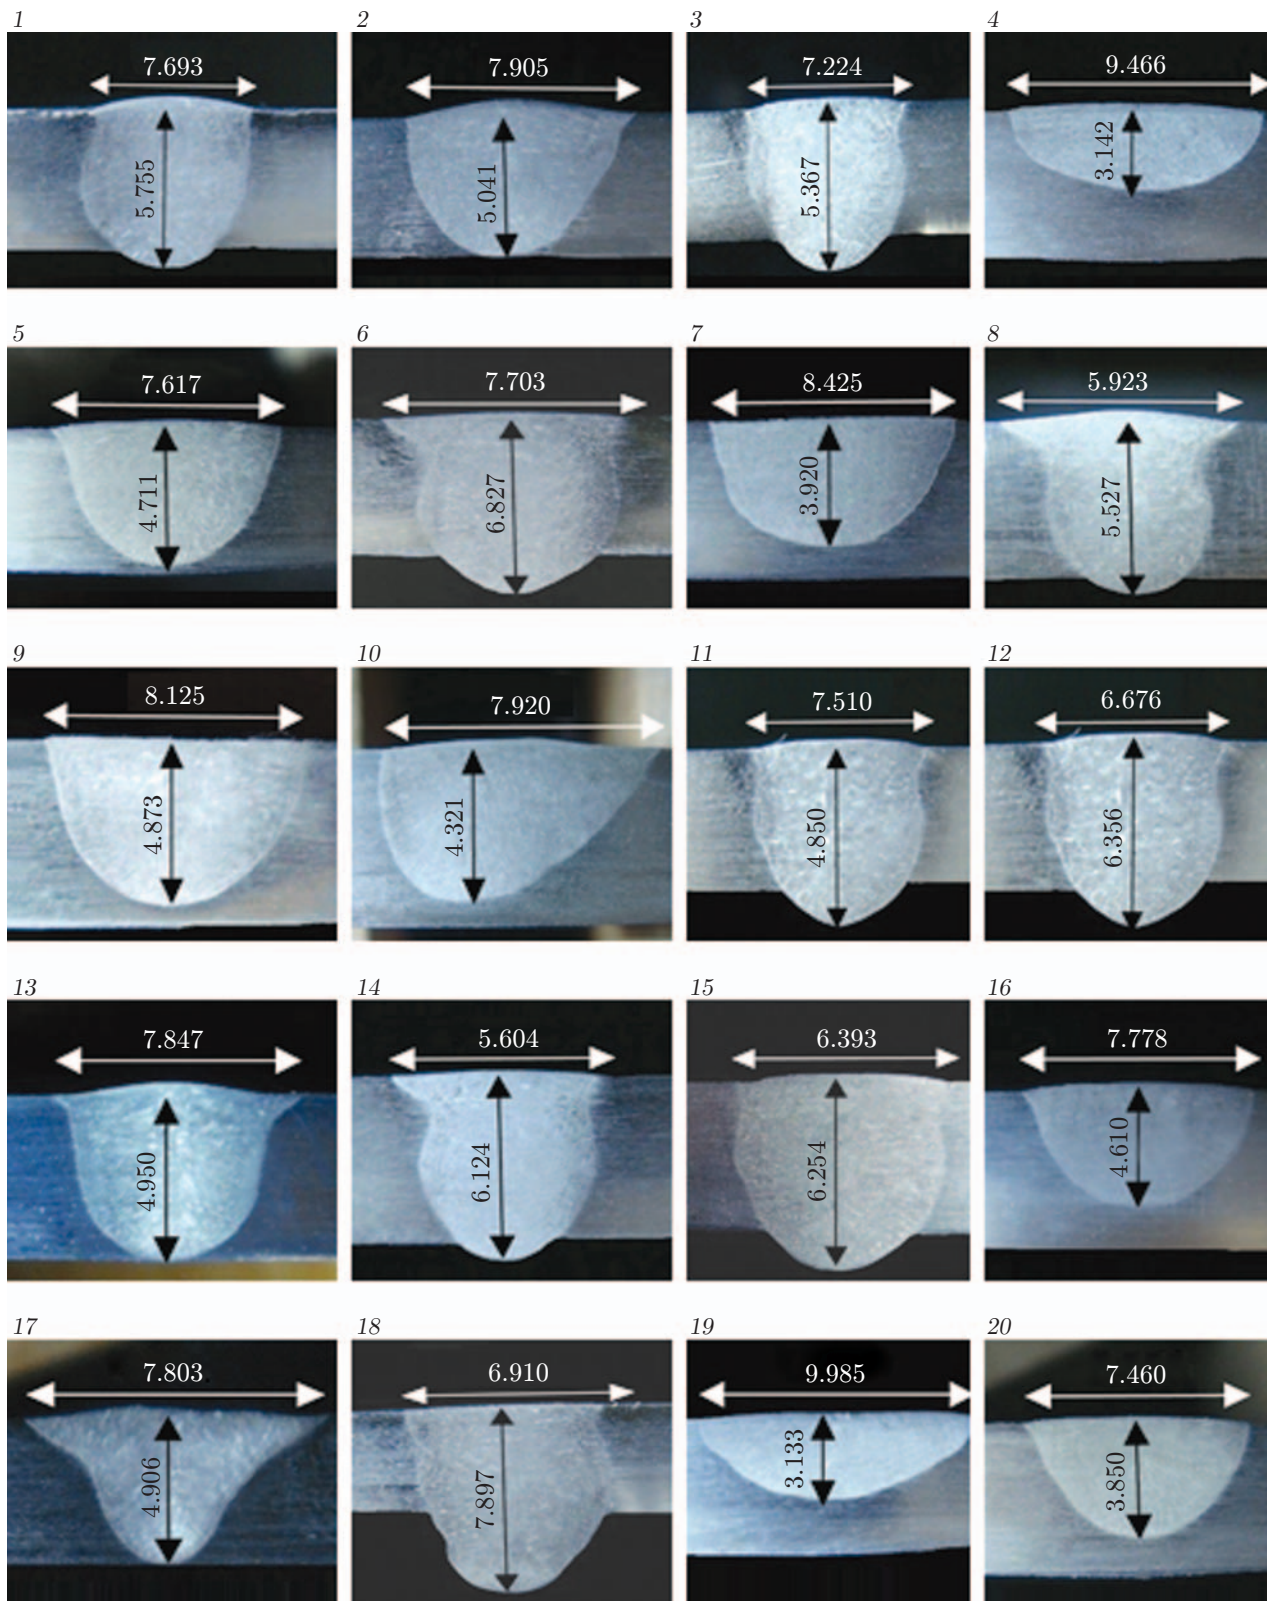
Cross-sectional profiles obtained by A-TIG welding in experiments 1-20.
